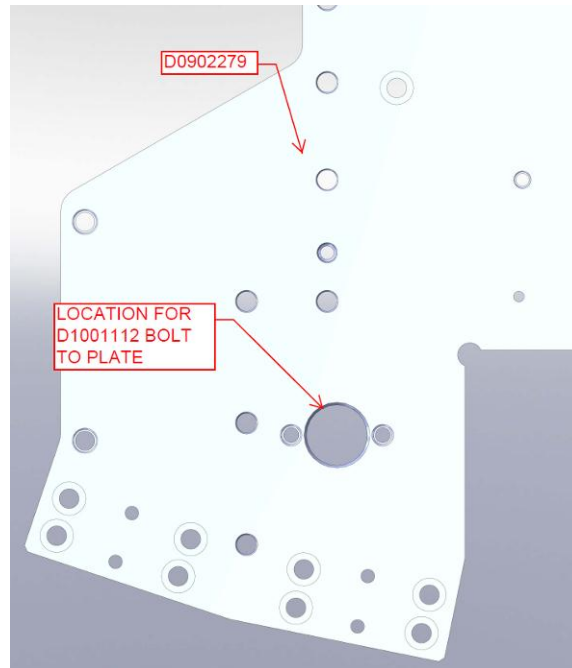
Location for D1001112 Stage 1-2 Tooling Standoff Pin on D0902279 Stage 1 Base Plate
